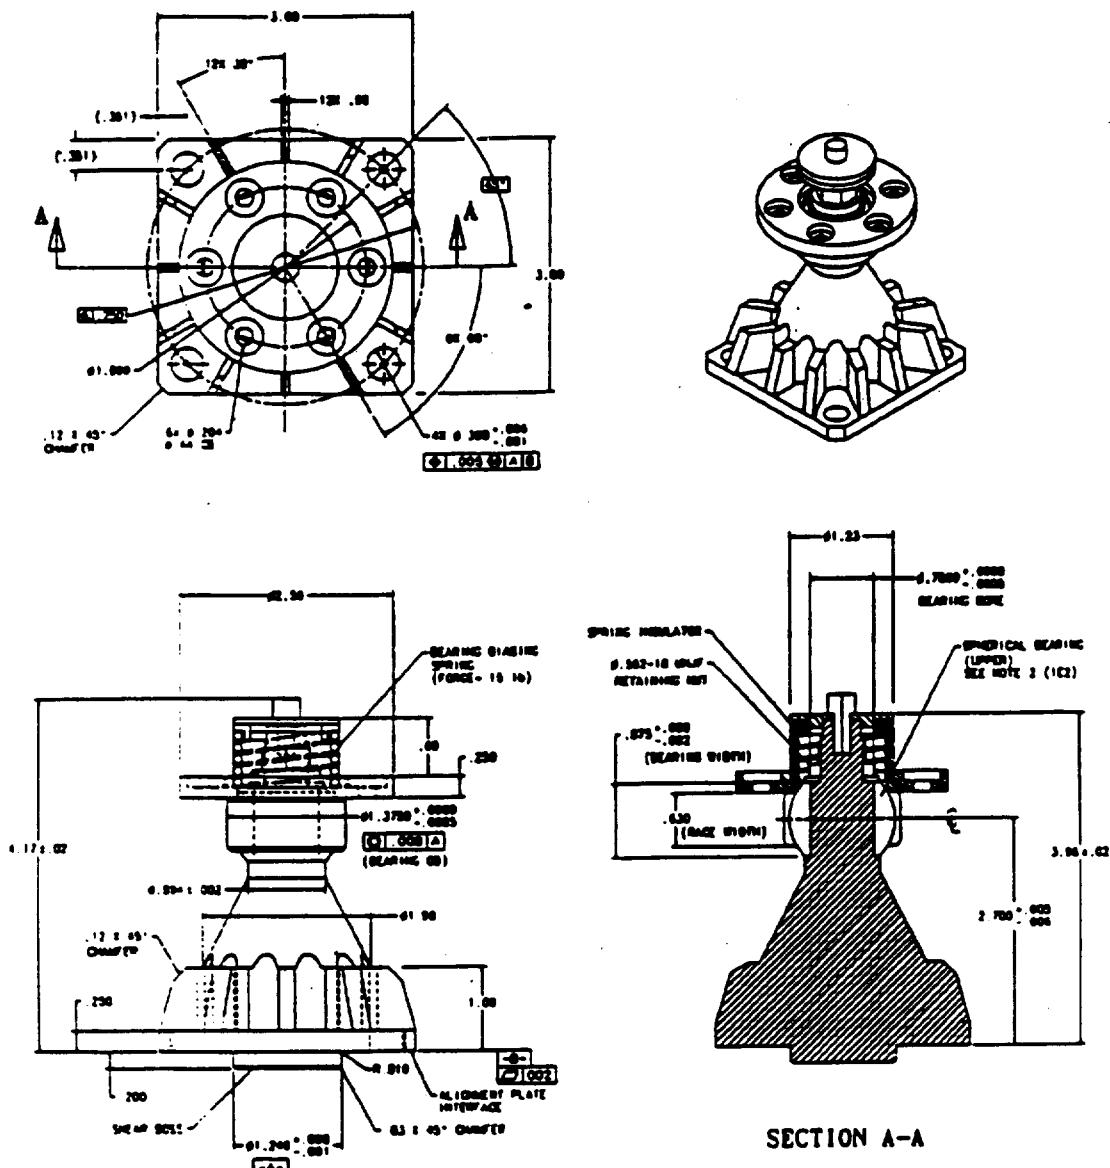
Three-Axis Restrained Kinematic Mount Assembly (KM3)
